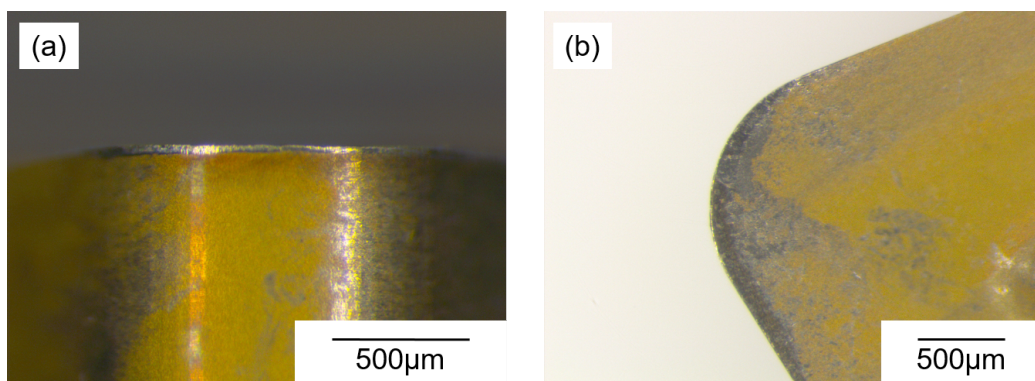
Example tool wear produced during face turning of face 4 on billet 3_1. The tool shown was used during the 1st repeat of face 4. The tool shown is representative of all passes performed on face 4
